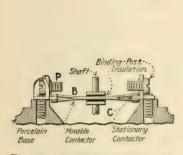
Illustrating contactor mechanism wherein the movable contactor, B, is of the jaw type and the stationary contactor, C, is of the plate type.
